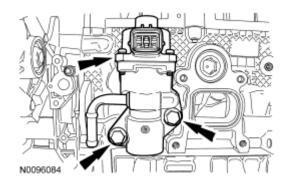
Locating EGR Valve With Mounting Bolts Courtesy of FORD MOTOR CO.
